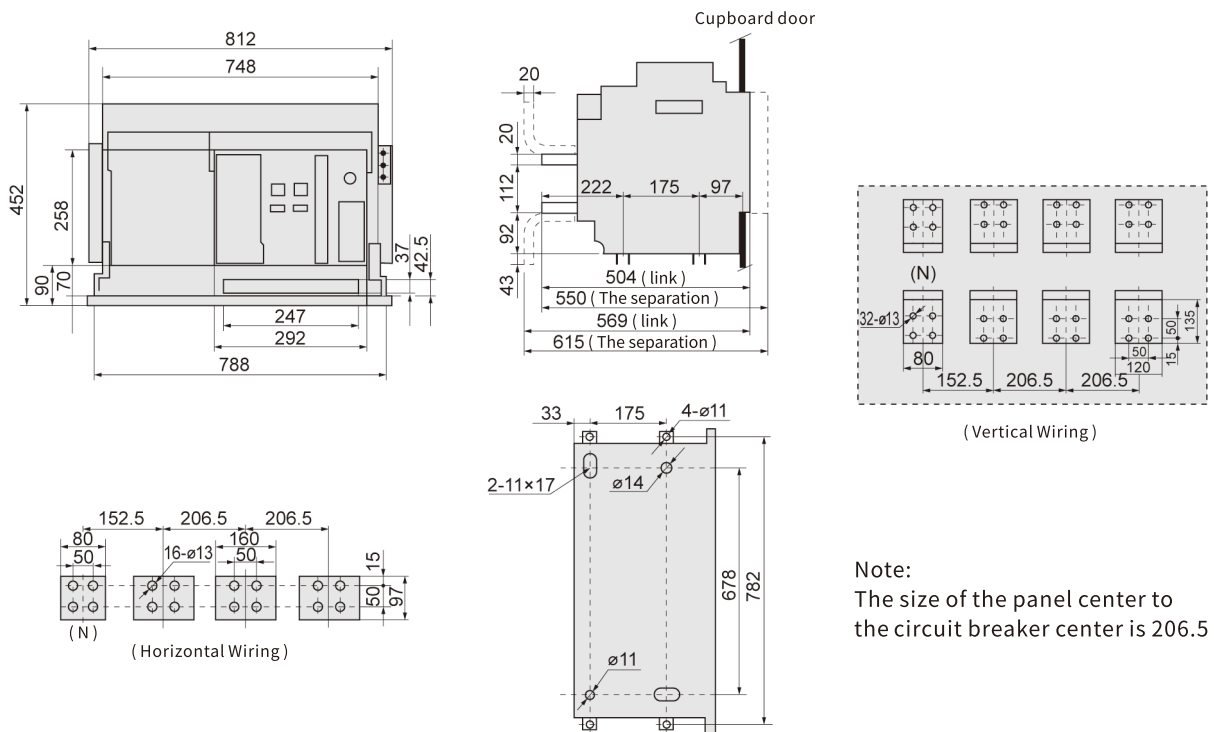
Outline and installation dimensions of drawout type circuit breaker (EKA1-3200, 3200/4)
